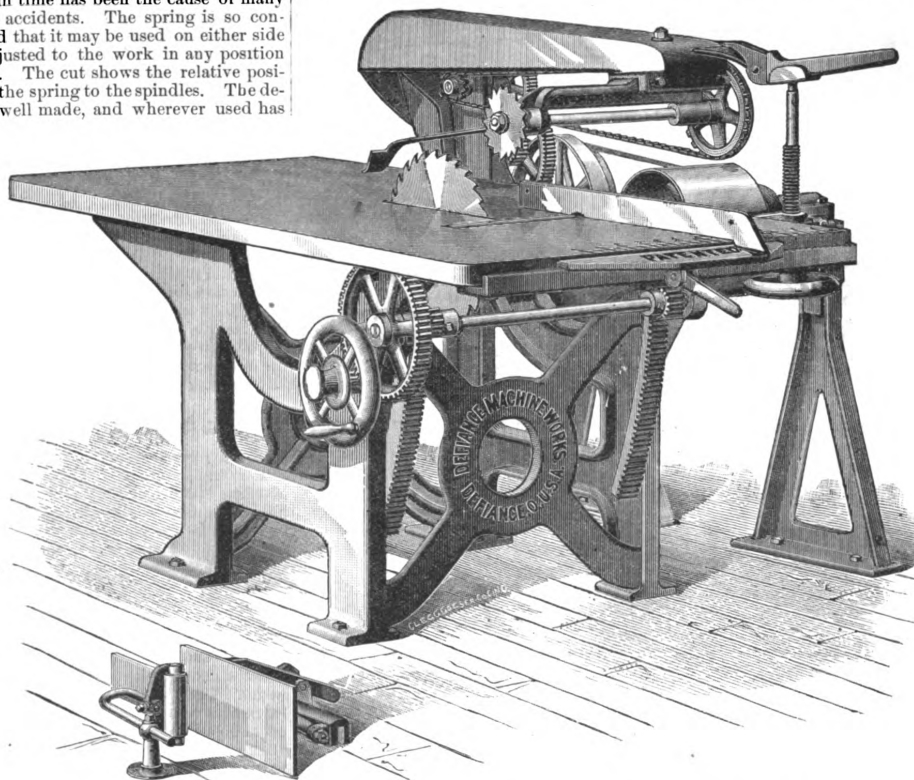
Patent Self-Feed Rip-Saw, Manufactured by the Defiance Machine Works, Defiance, Ohio.
